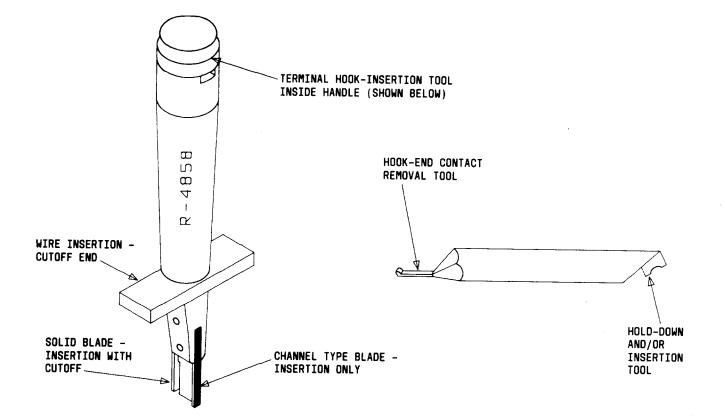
R-4858 (Amp No. 266187-1) Repair Tool
